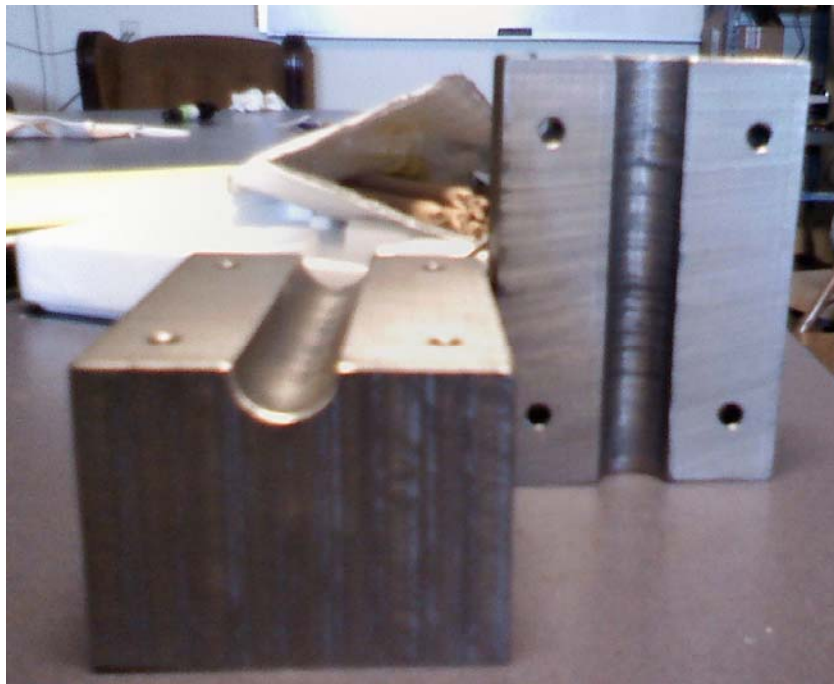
Sectioned view of both halves of the fixture. Note the channel for the spar and 4 bolt holes. This was later welded to a steel base.
